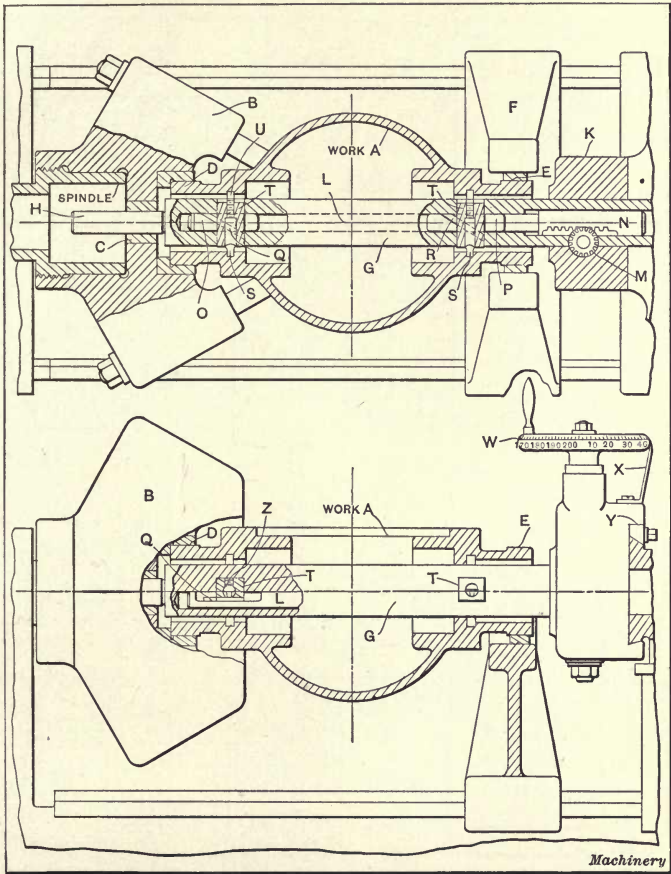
A Double Recessing Tool Arrangement for a Rear Axle Housing
